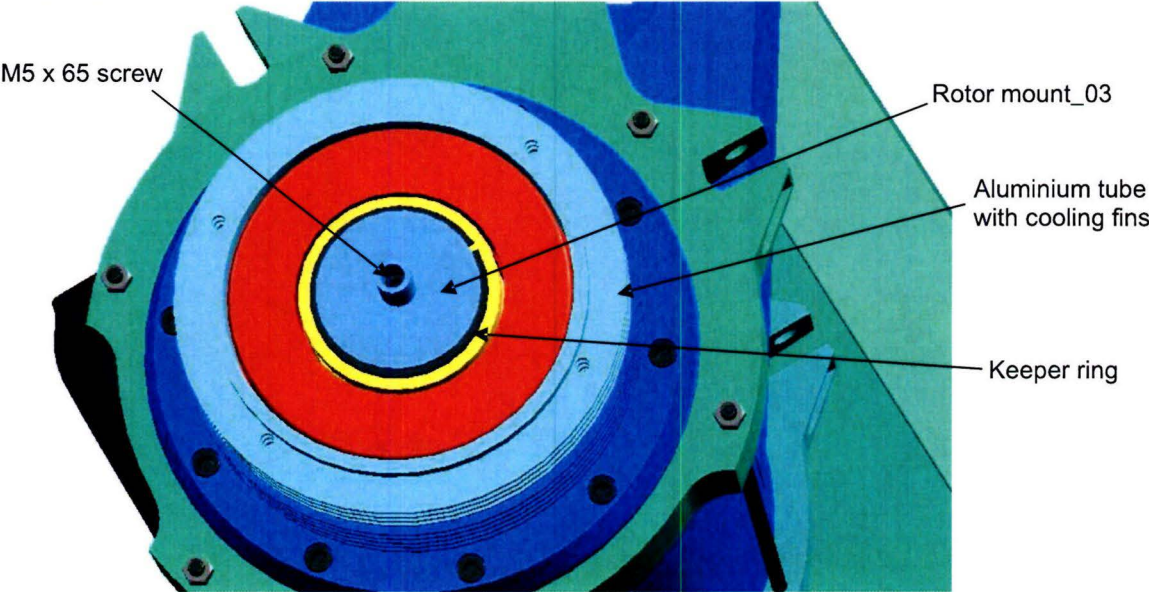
“Aluminium tube with cooling fins” and “rotor mount_03”
